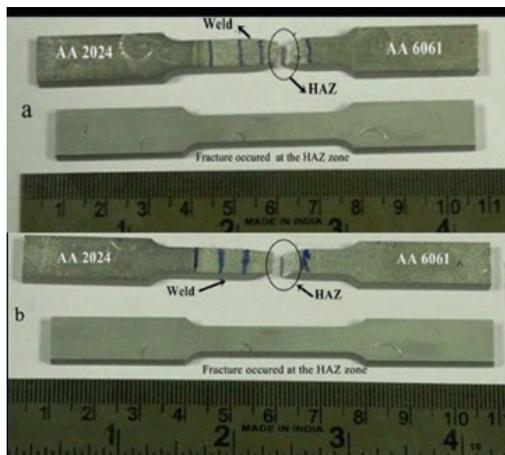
Tensile tested AA 2024 and AA 6061 samples welded with (a) Cylindrical threaded pin (b) Squared pin.
